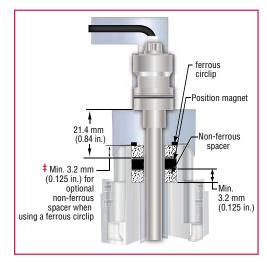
R-Series Model RD4 sensor installation using bottom cable connection and pressure fit rod style 'S'
